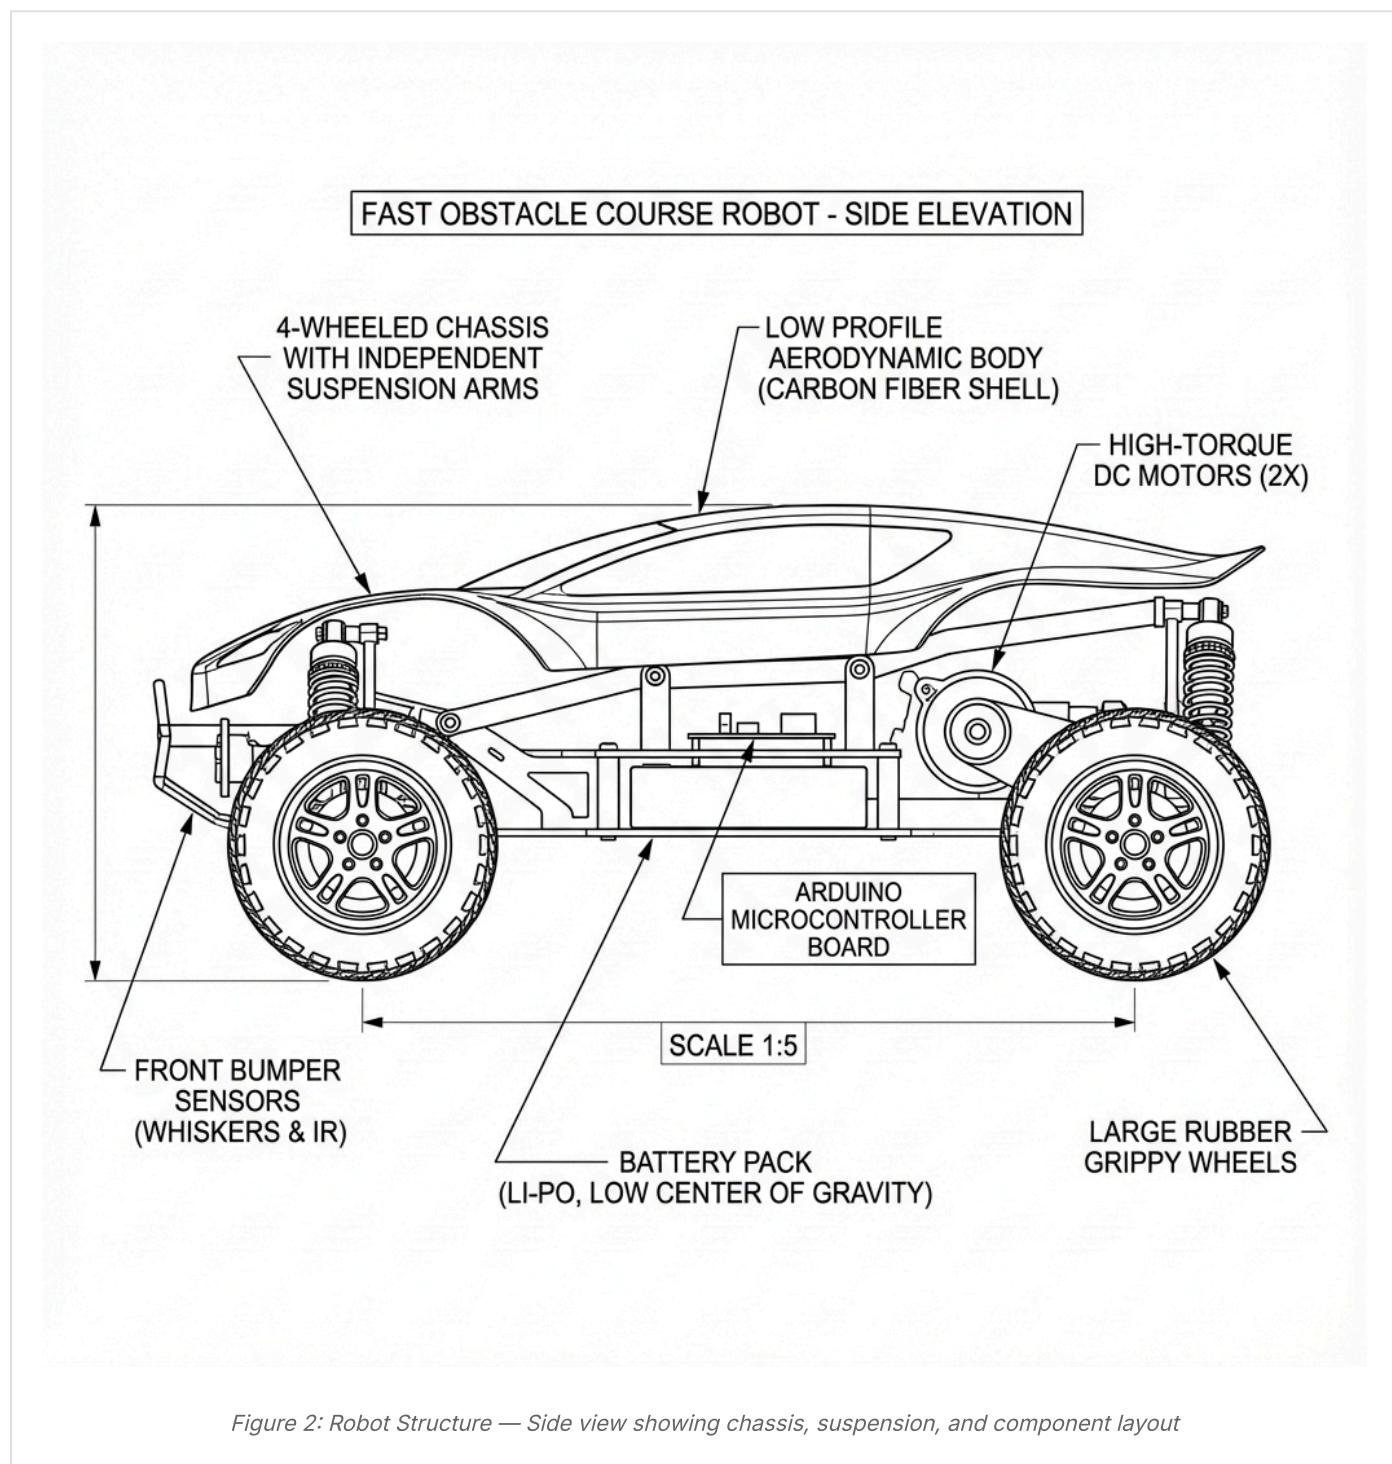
Robot Structure — Side view showing chassis, suspension, and component layout
